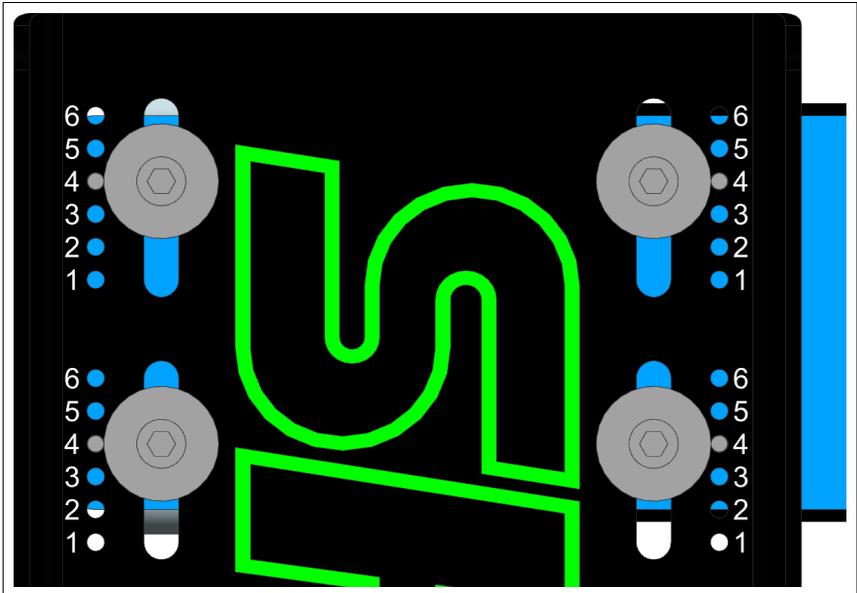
Top motor position numbering system. Motor sled locating pins shown in position 4 of 6. Motor sled shown in blue for clarity. Hole numbers are shown to illustrate numbering system only, and do not actually appear on machine.
